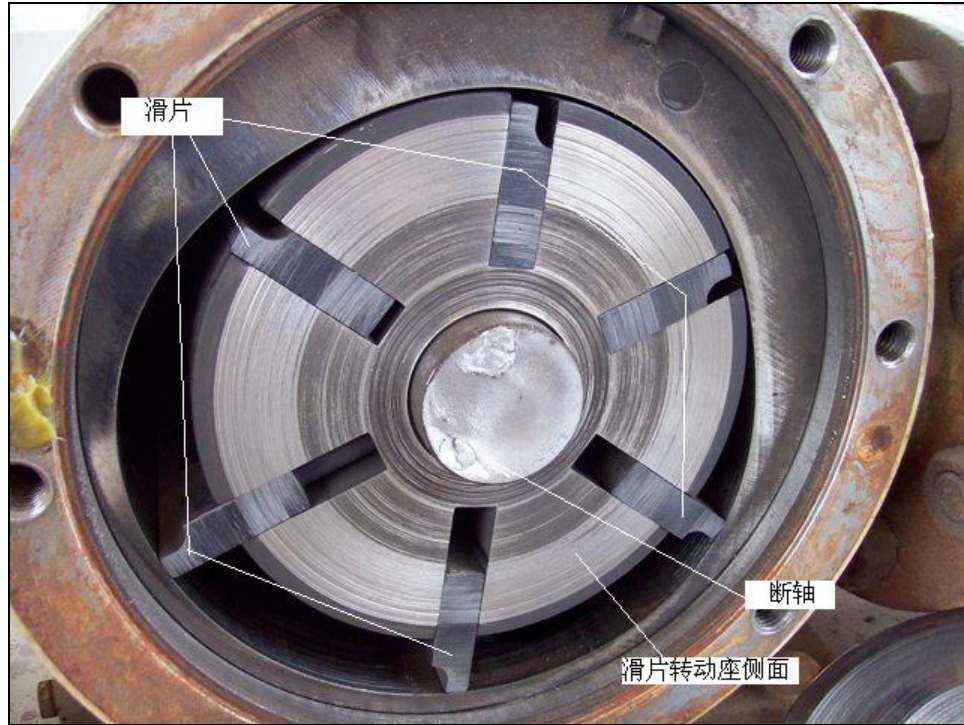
Photograph of Typical Pump Fracture Surface Motor Side
